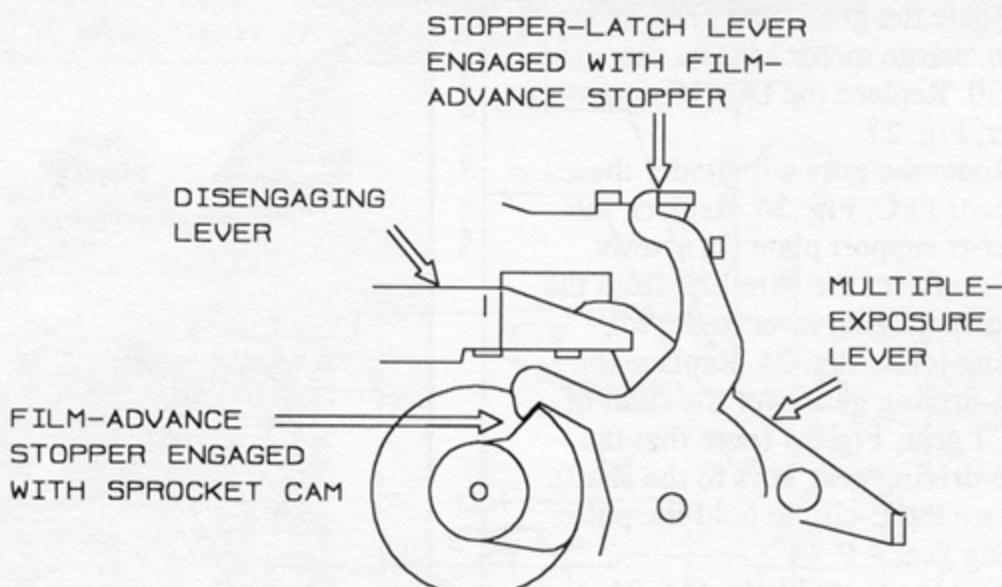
TOP OF LOWER FILM-ADVANCE BASE PLATE
